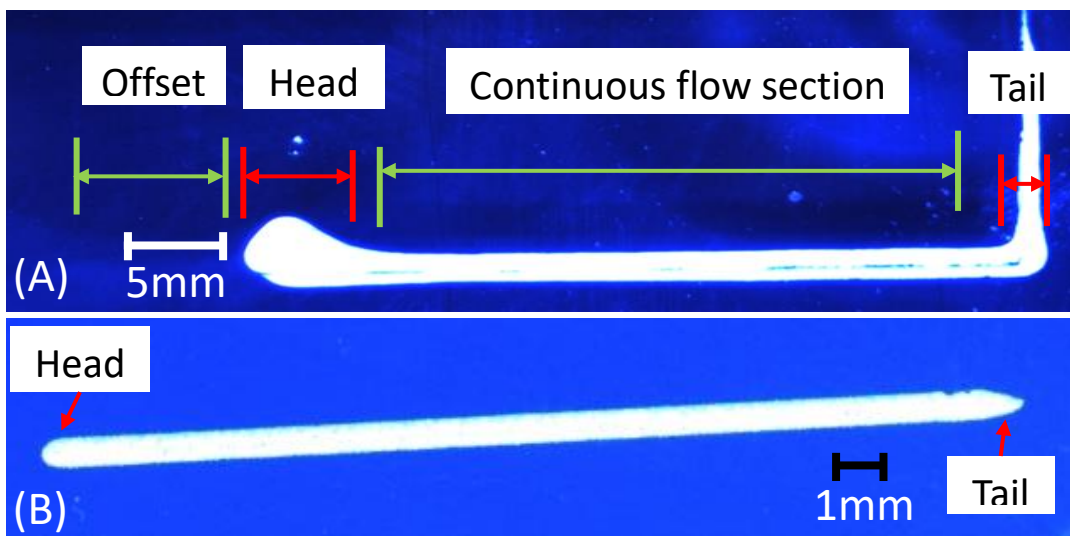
Printed beads captured with CMOS camera (A) 50 mm single bead printed with pressure adapter housing (B) 20 mm single bead printed without pressure adapter housing
